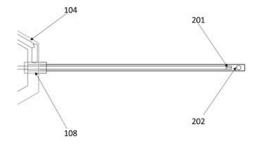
Enlarged view of the Cutting tool portion with sealed chamber.
